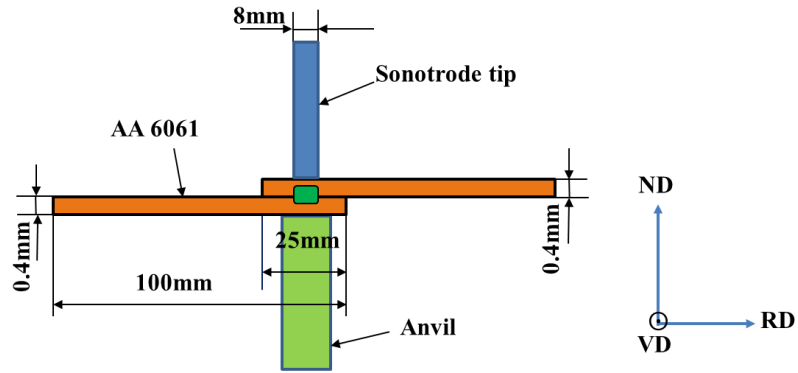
Schematics of ultrasonic spot welding setup
